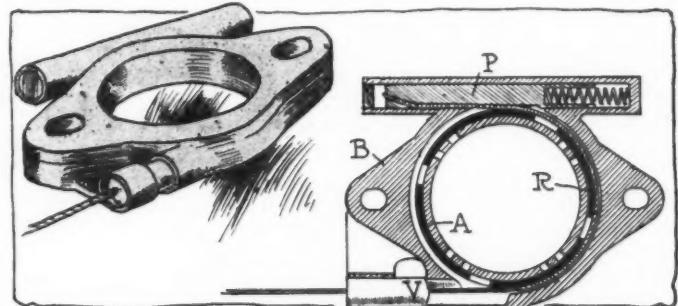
Shimpf fuel economizer for attachment to manifold flange
